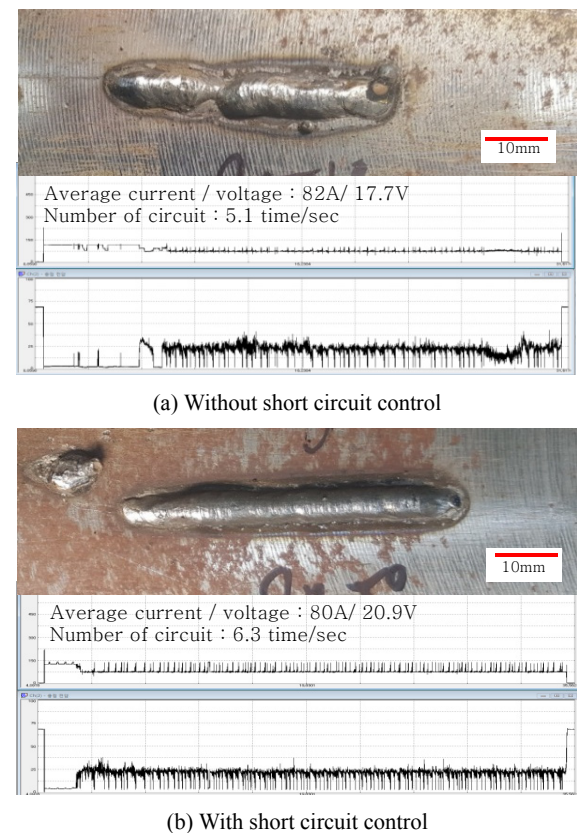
Welding bead and waveform at 80A using low hydrogen type electrode of 3.2 ϕ
